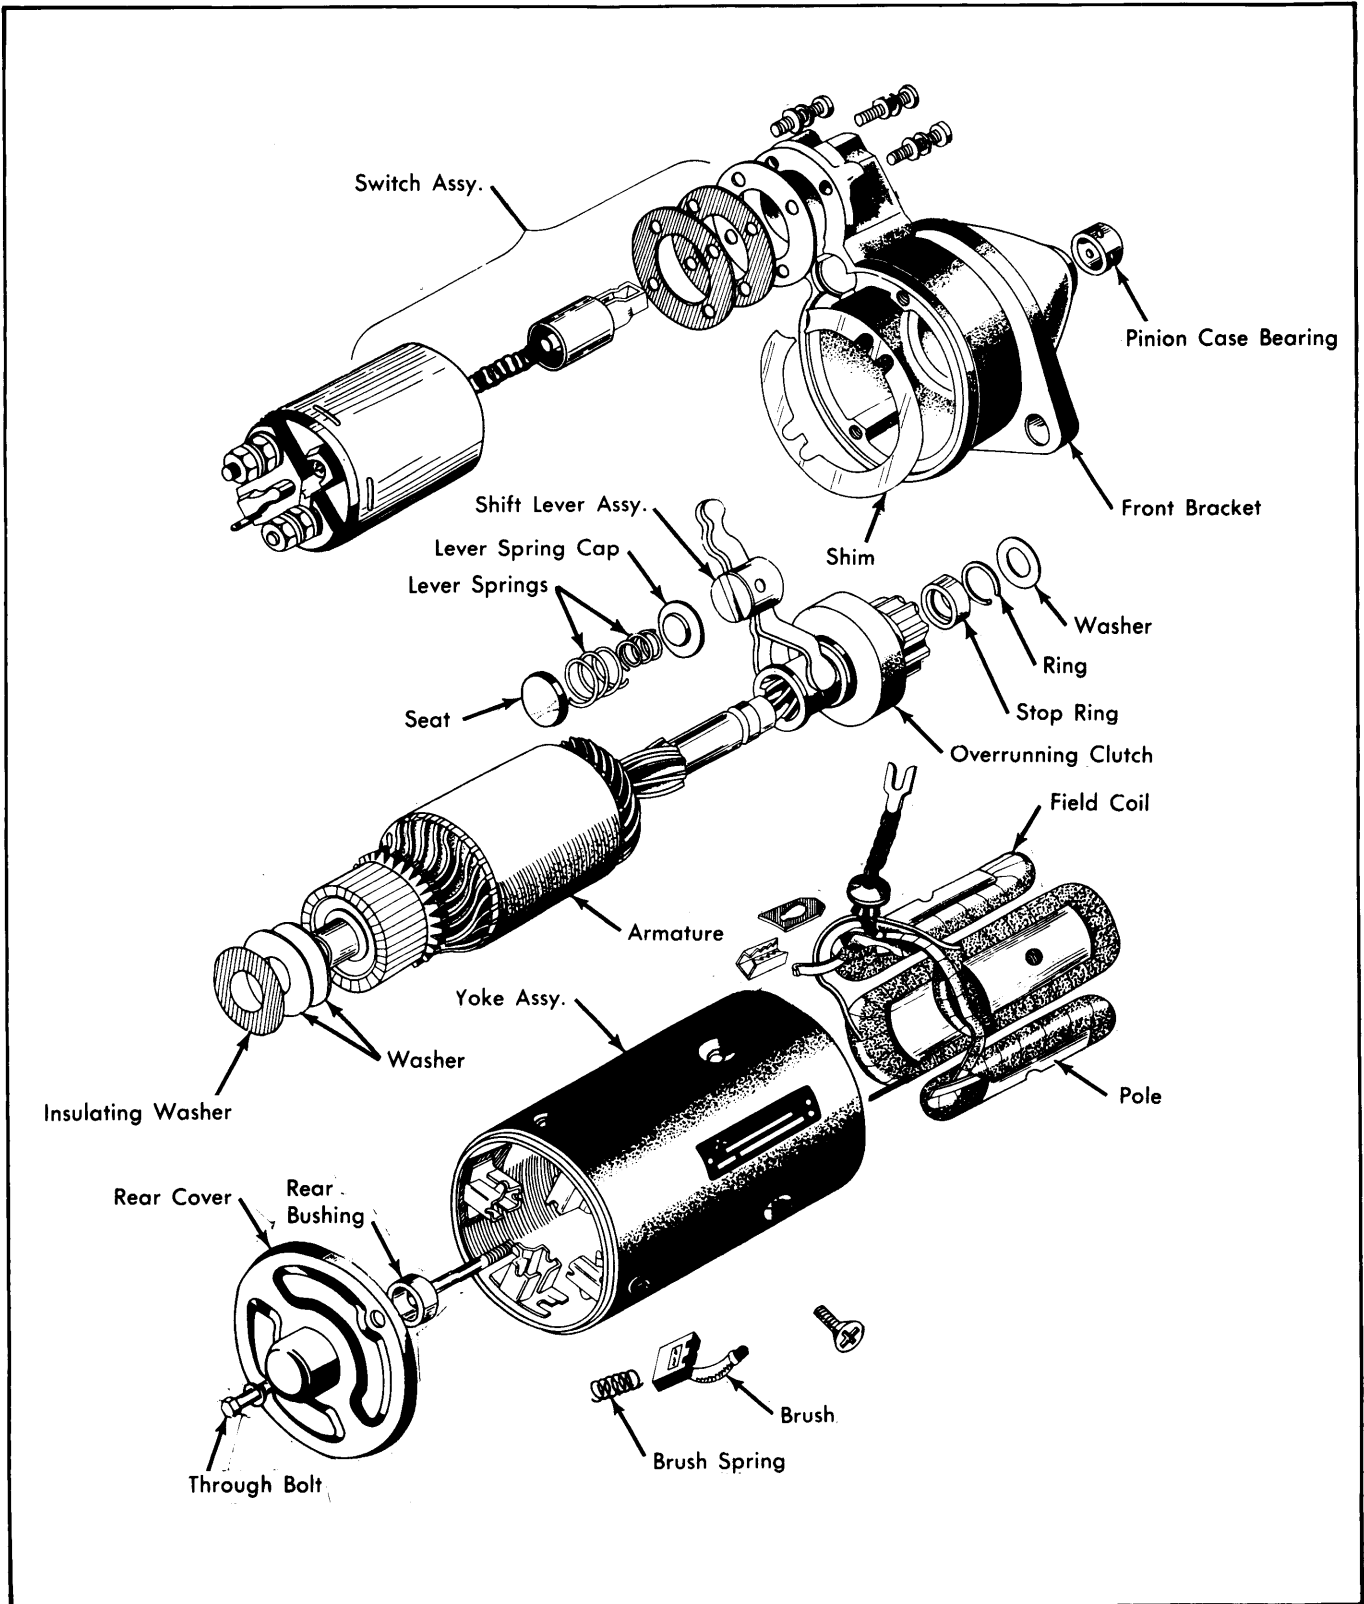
Disassembled View of Typical Mitsubishi Starter
